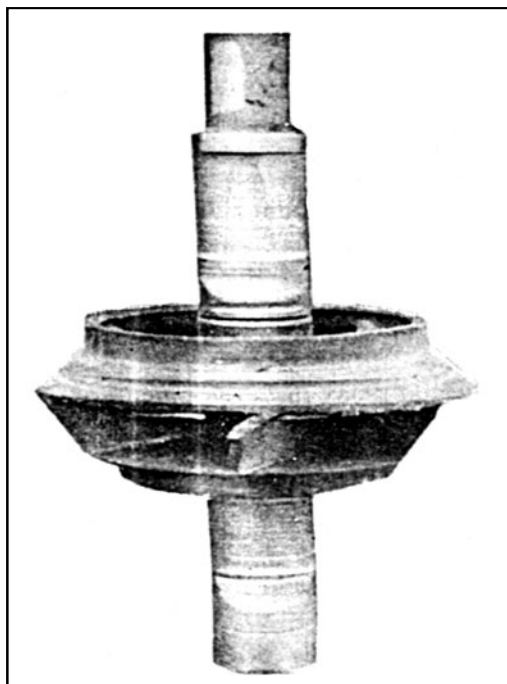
Worn-out impeller and shaft of a submersible pump. Sand pumping due to the improper design of gravel pack has resulted in the excessive wearing and failure of the pump. (Village Mehmoodpur, Distt. Roop Nagar, Punjab)
